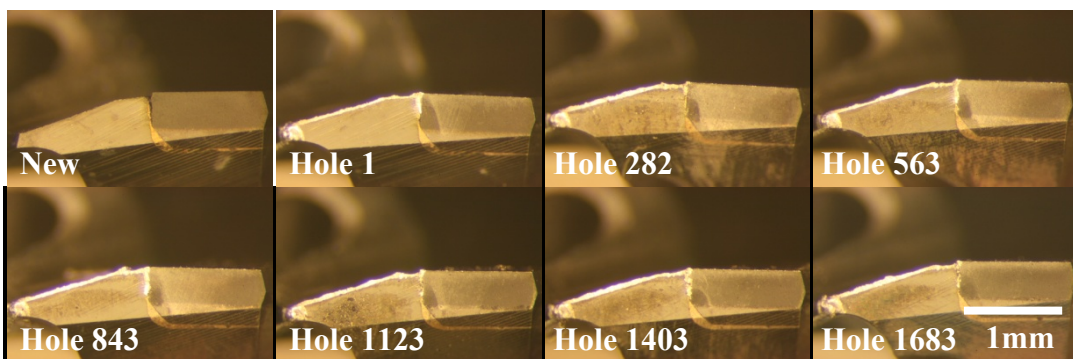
Tool wear micrographs of brazed PCD CTB010 drill under 3bar cutting fluid, 260m/min cutting speed (Test 6)
